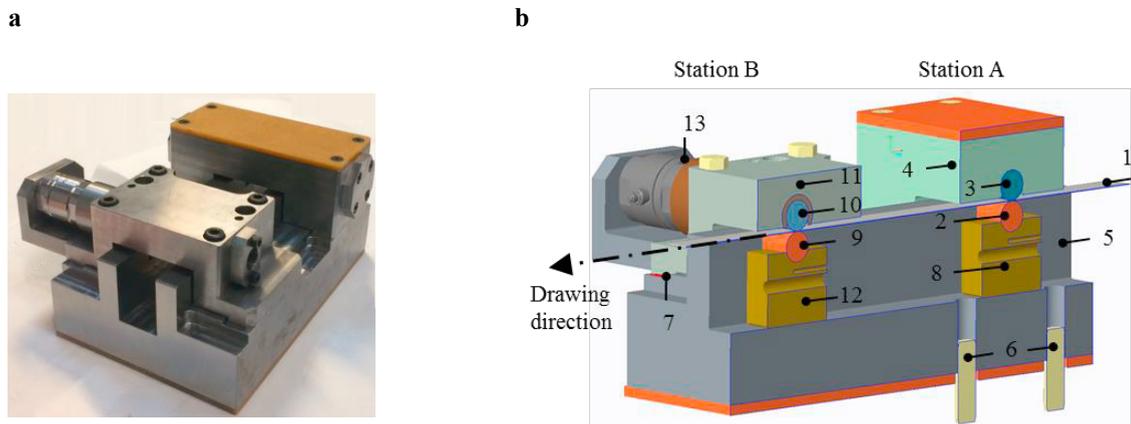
(a) Photograph of the new SRT tool design and (b) schematic cross-sectional view of its main components.
